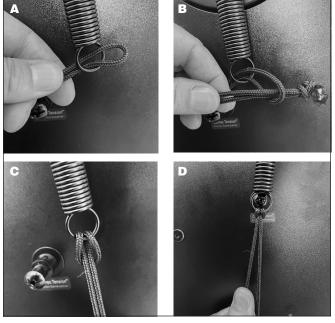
Attach a pull loop to the end ring of the springs as shown in A through C. Then grip the pull loop and pull down on the spring (D) until you can place the spring's end ring over the screw head and onto the narrow part of the spring post. Then release the pull loop.
